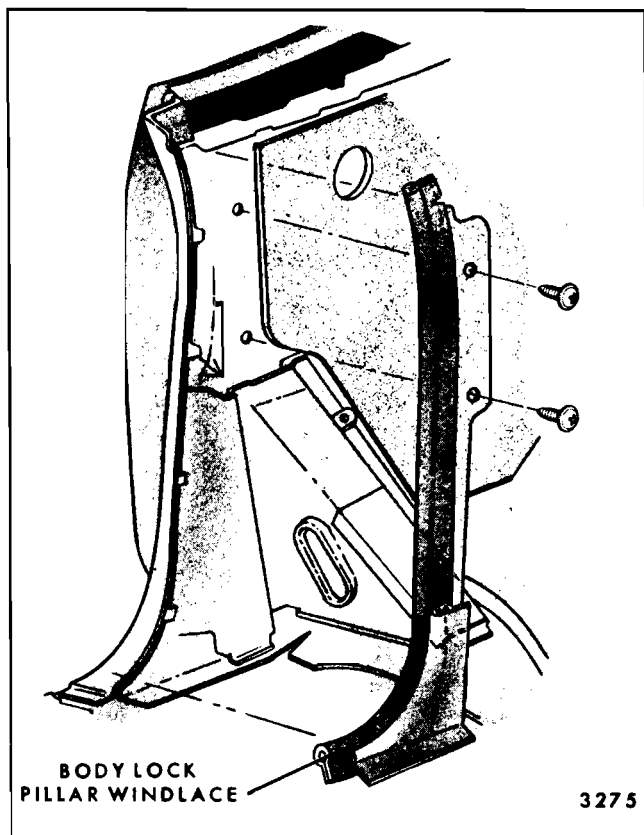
Body Lock Pillar Windlace Assembly - "A-B & C- 37, 47, 57, 67 and 87" Styles
